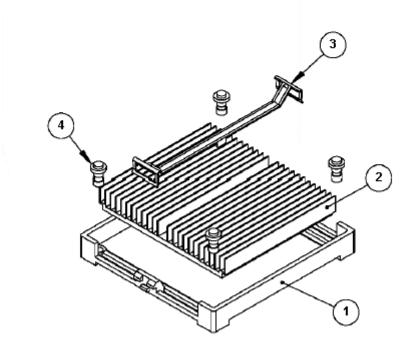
Exploded Views (1) of a Heat Sink Attachment using a Plastic Force
